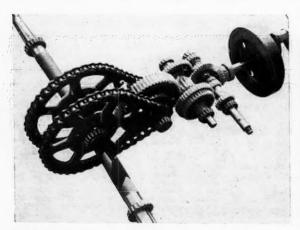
EXPOSED VIEW OF A WHEEL TYPE TRACTOR DRIVE MECHA-NISM SHOWING RANGE OF SIZES OF GEARS EMPLOYED
